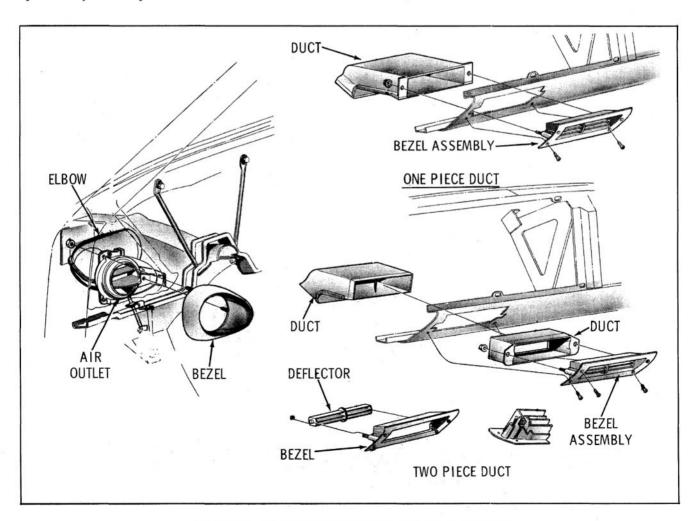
Air Outlets and Controls (30 - 31 & 32 Series)
